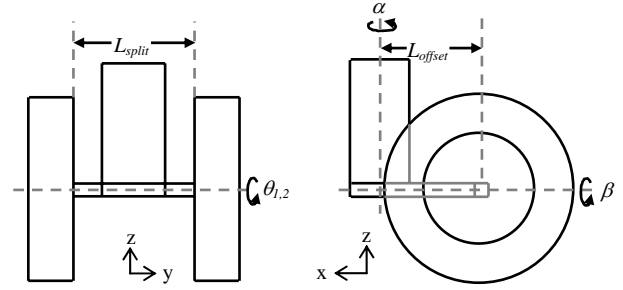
Active split offset caster wheel assembly front view (left) and side view (right).
